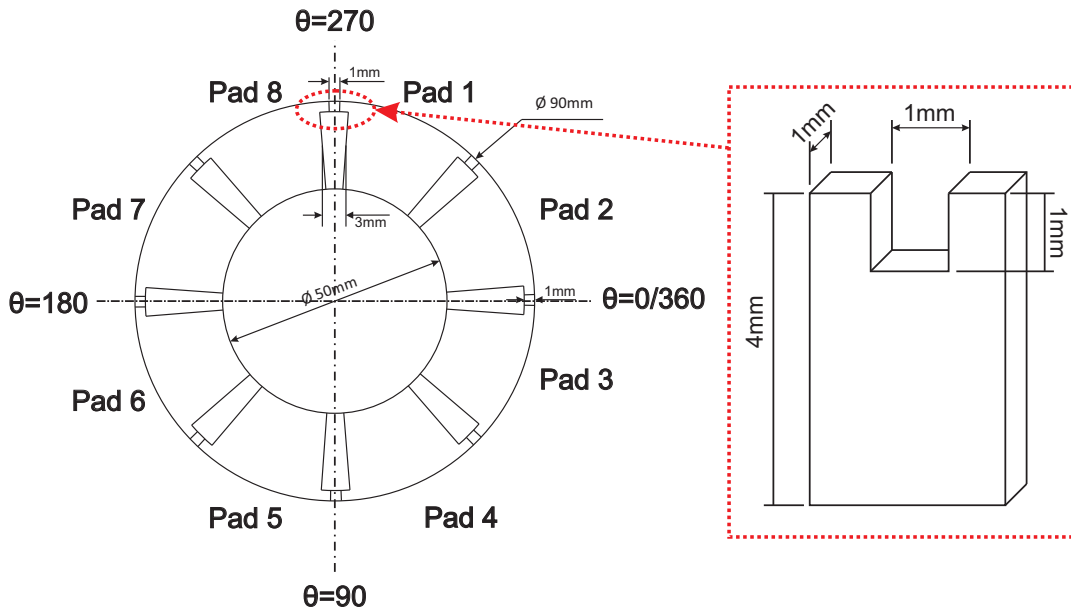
Thrust bearing top view and gouge design details.
